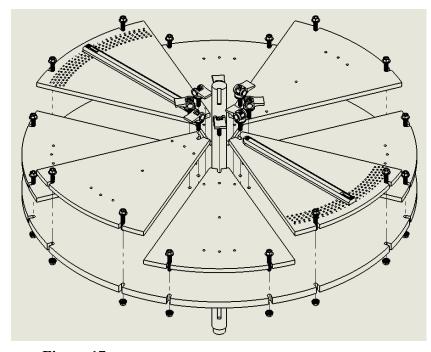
Adding the Pie Pieces to the Turntable Assembly
